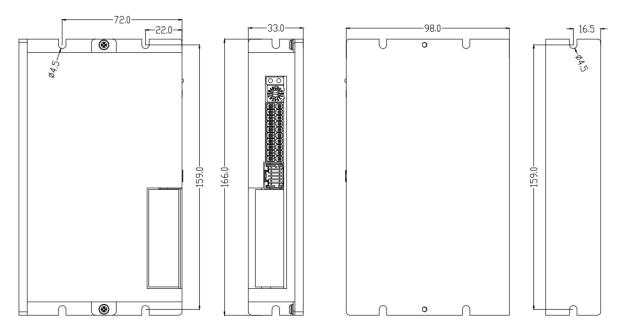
(B) installation method of drive ELD2-CAN7015B/ELD2-CAN7020B/ELD2-CAN7030B
